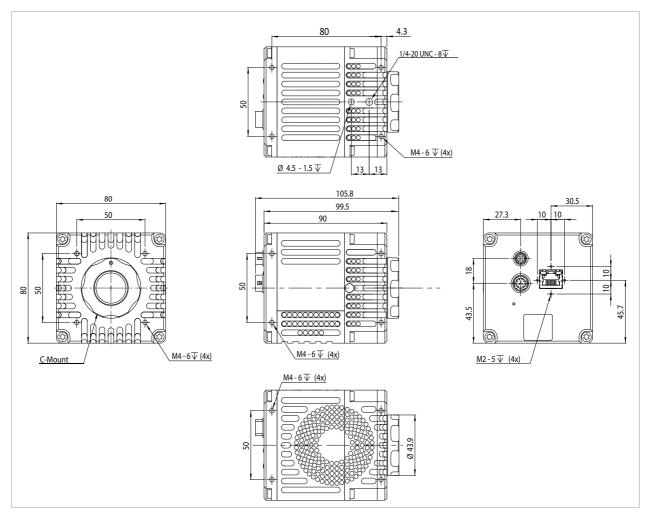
Goldeye G, Cool model, dimensions with C-Mount lens adapter
